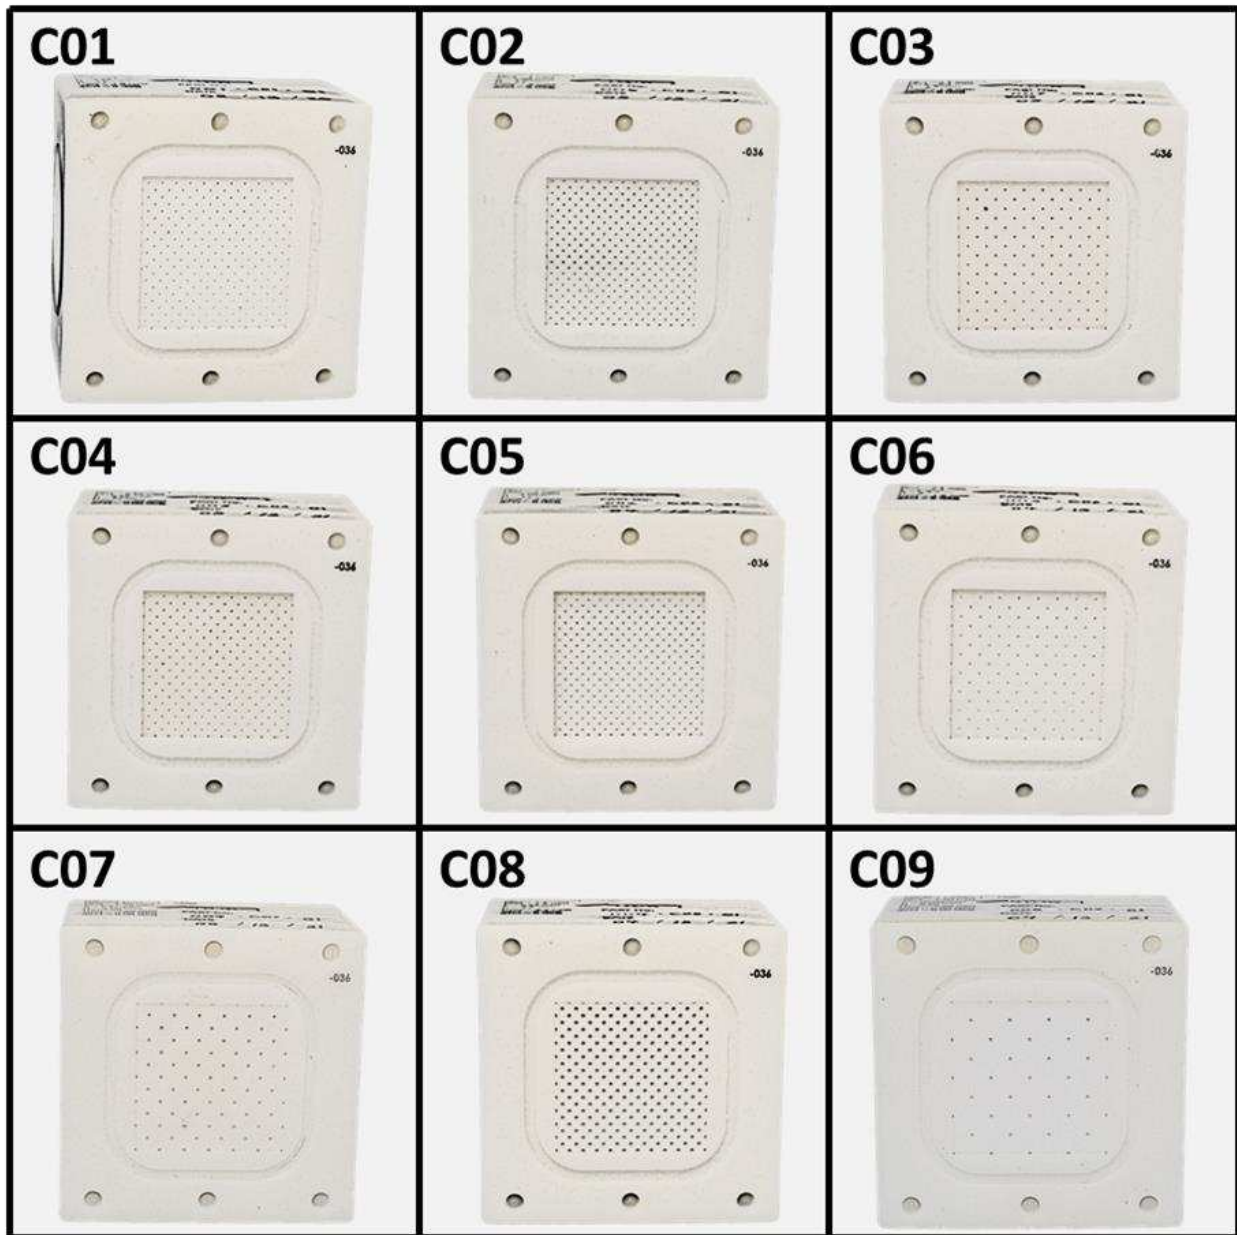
Impingement array view of C01 thru C09 as-fabricated impingement test sections
